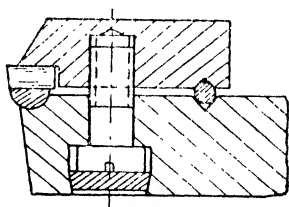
Diamond cut flat on the lower side and cemented by a cold process to a hardmetal hemisphere
